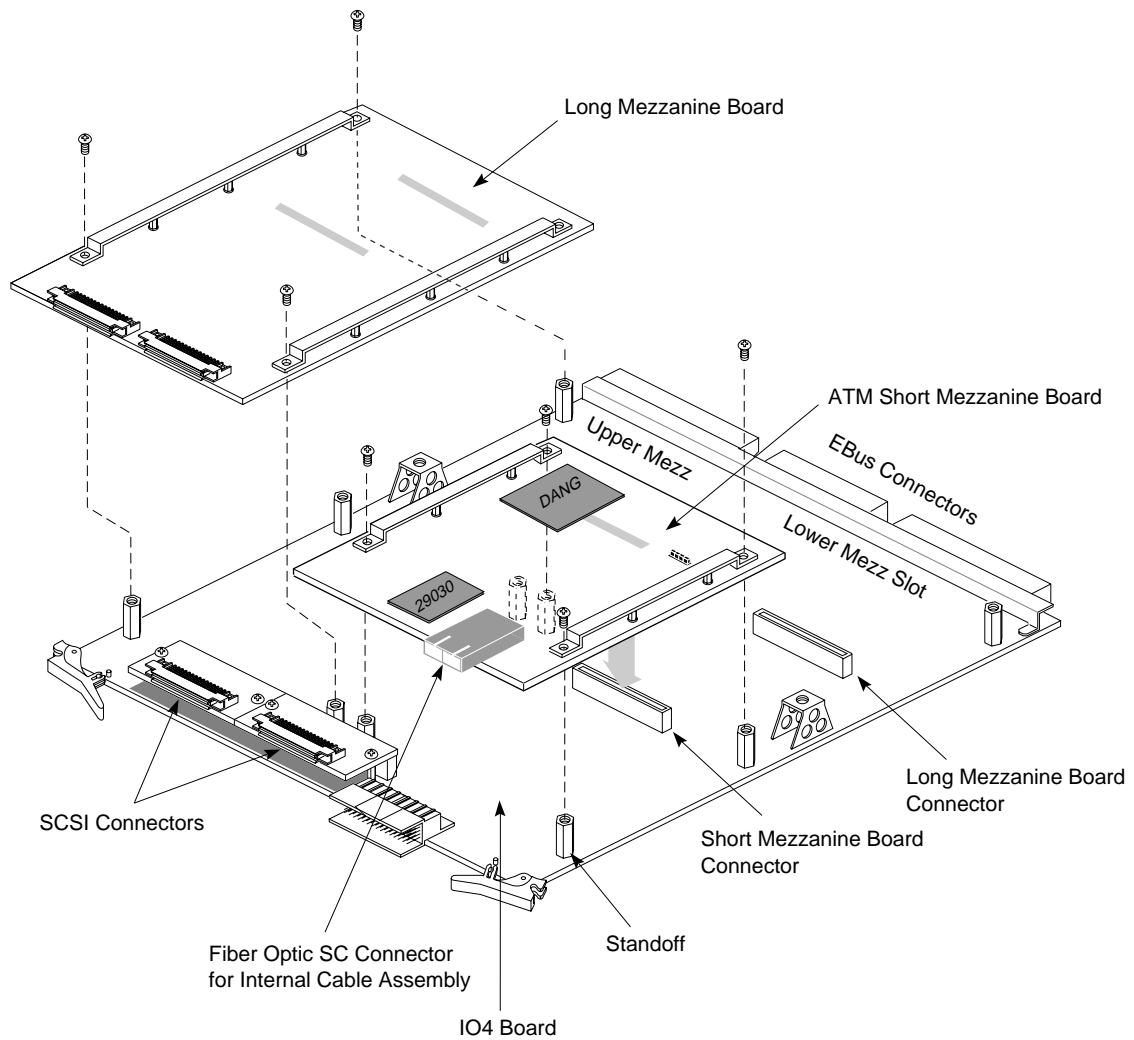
IO4 Board with an ATM Mezzanine Board
